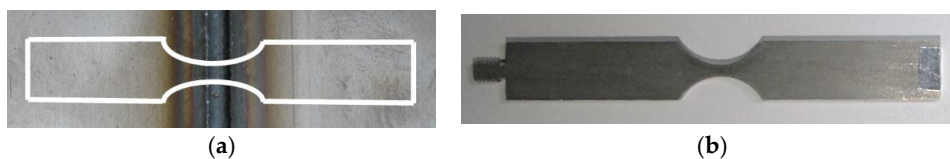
(a) Welding plate; and (b) welding ultrasonic fatigue specimen.
